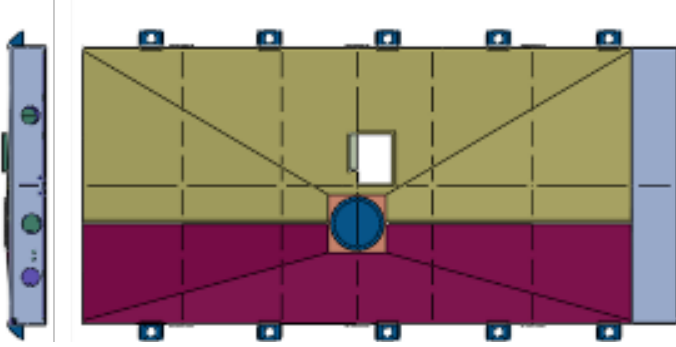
Side (left) and Bottom (right) Views of DMU Fuel Tank
